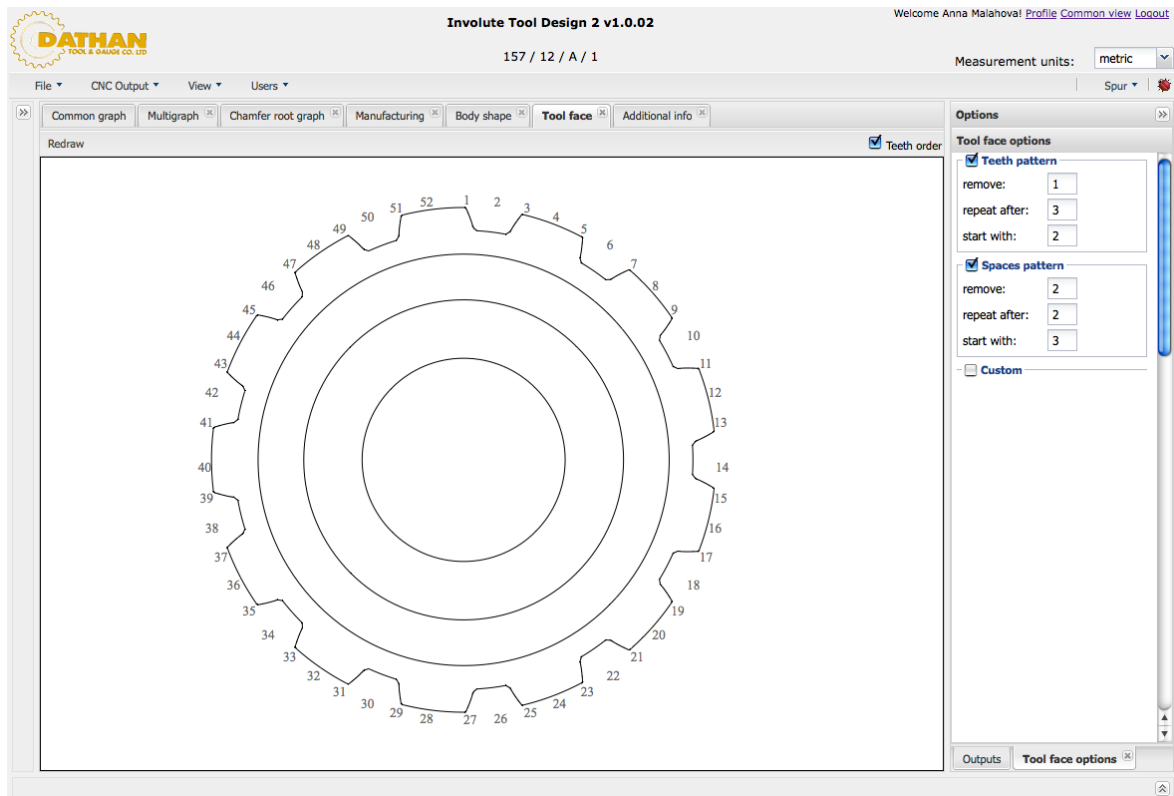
Tool face drawing. Inputs in the collapsible panel in the right side of the screen define which teeth or spaces to remove on the tool face. Cutter teeth are numbered clockwise in the drawing for the ease of reference in custom patterns
